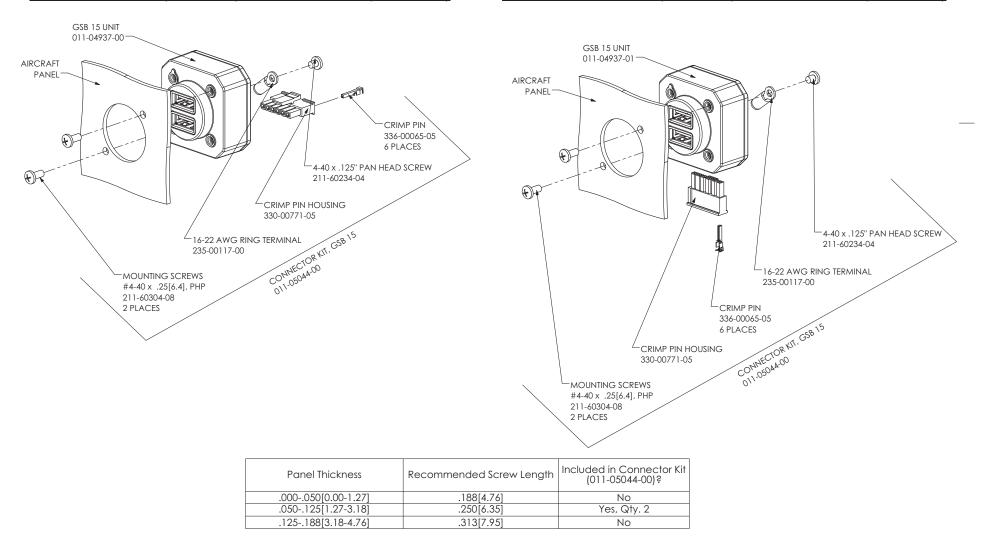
GSB 15 Installation Drawing (011-05044-00 Mounting Kit)
